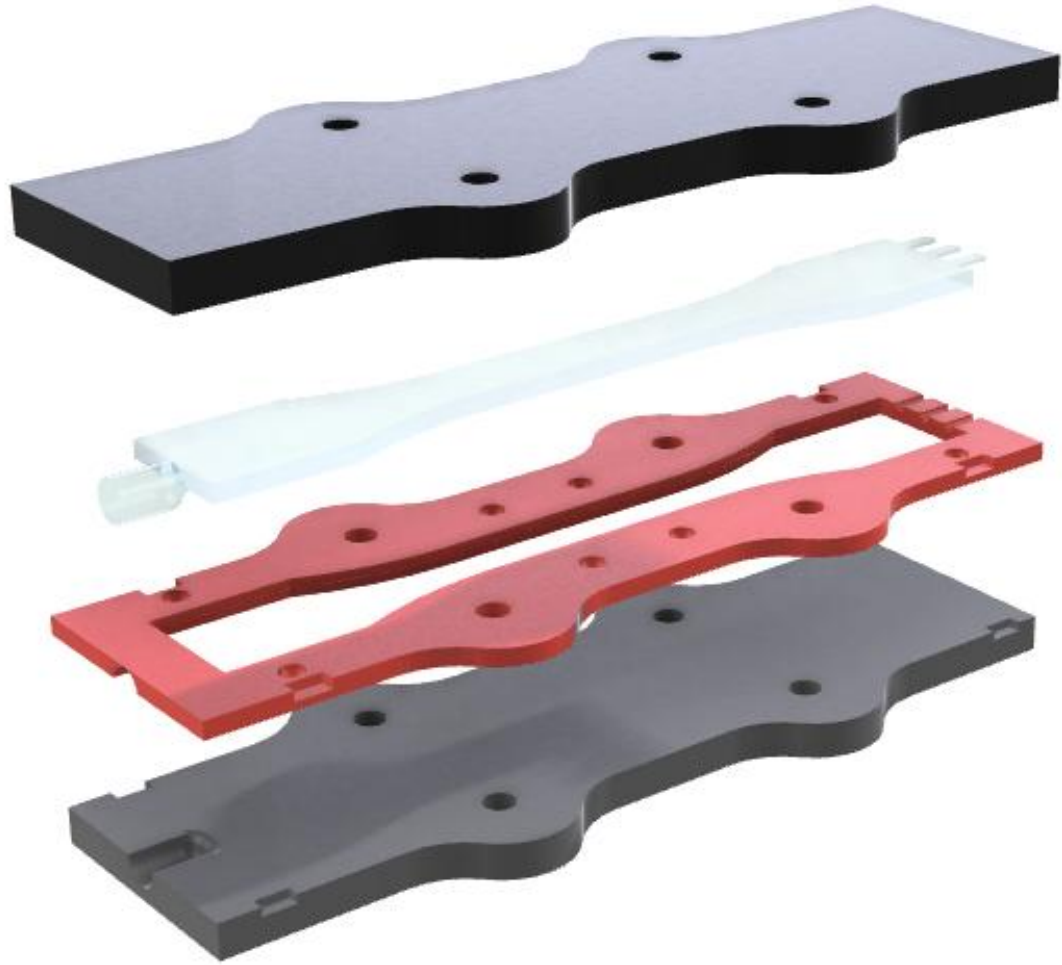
CAD Model Representing the Mold and Cured Specimen Removal.
